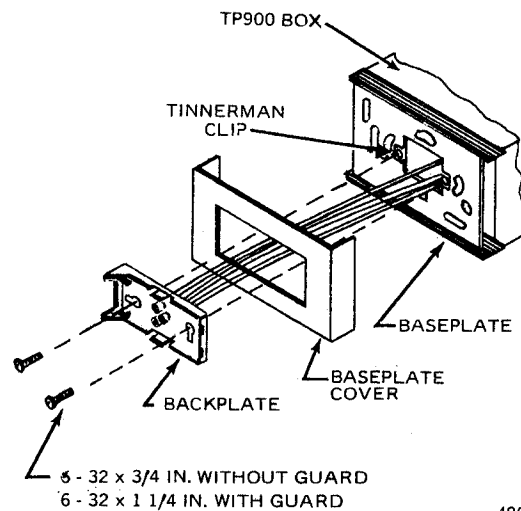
Backplate to Baseplate Assembly, TO900/TP900 Replacement.
